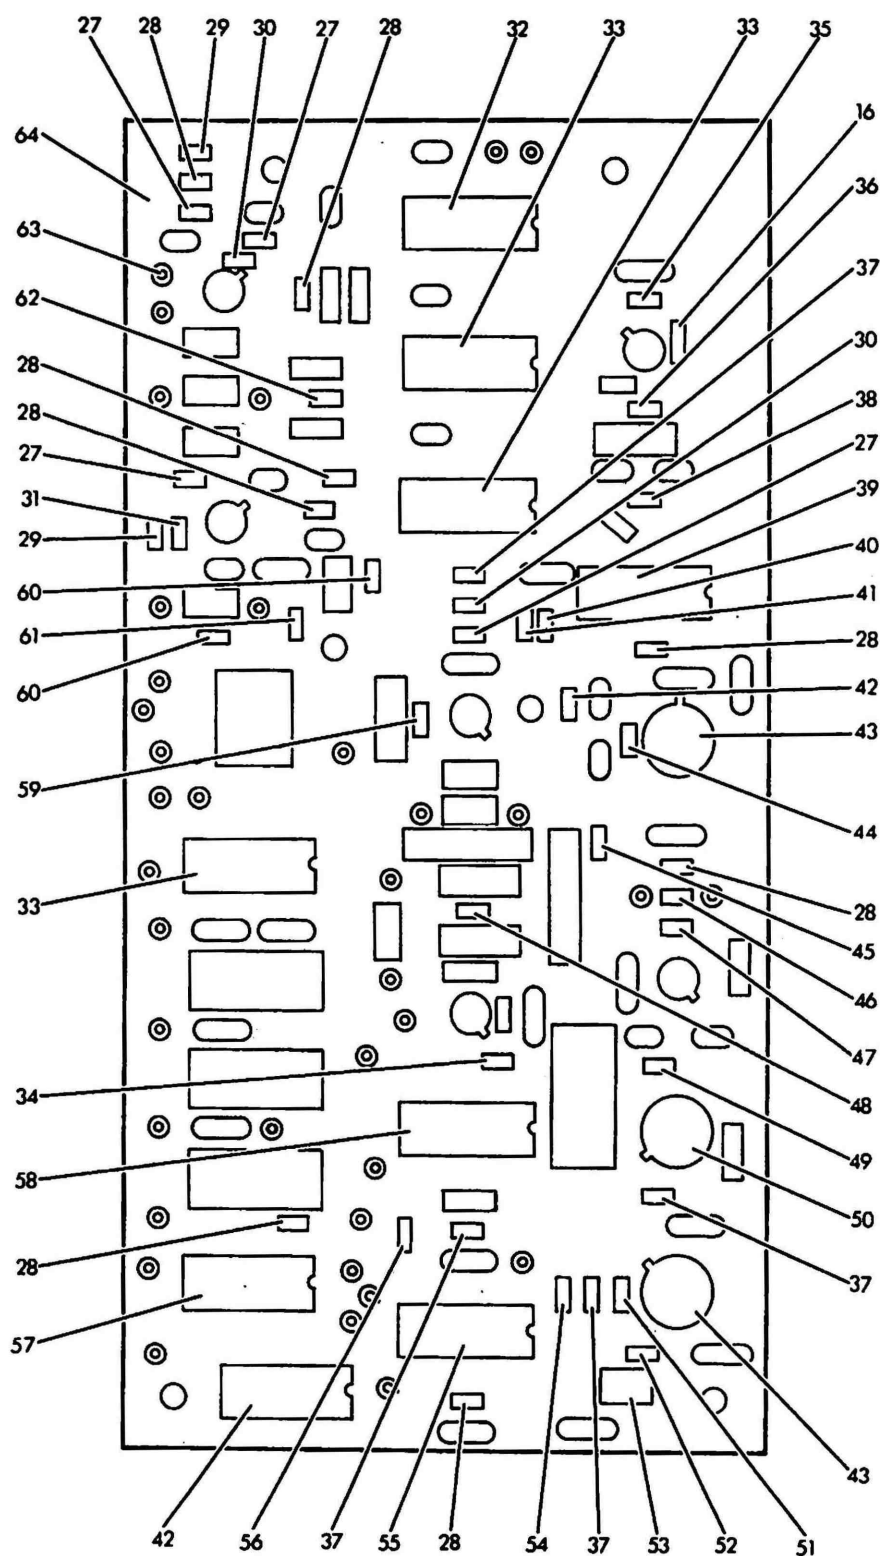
Single Side Band and Divider Board Assembly (Sheet 2 of 2)
